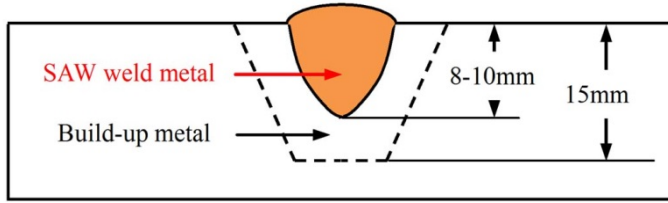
The schematic drawing showing the preparation of the weld metal
